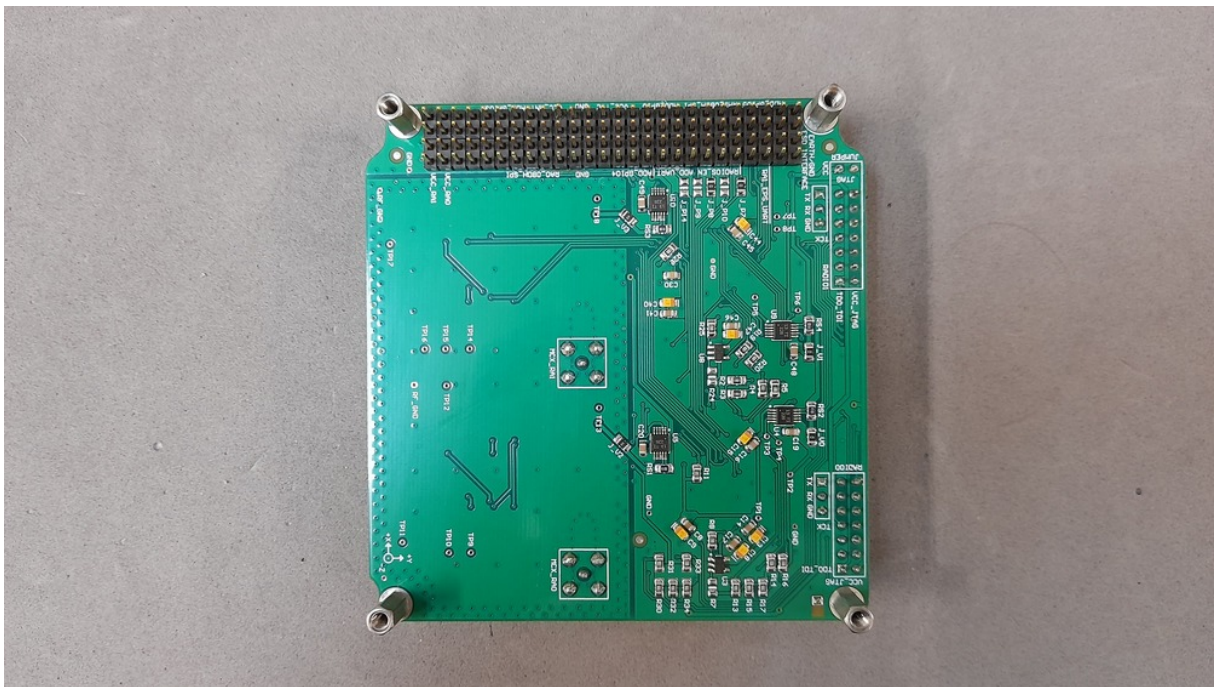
Bottom view of the TTC 2.0 v0.1.1 board.
